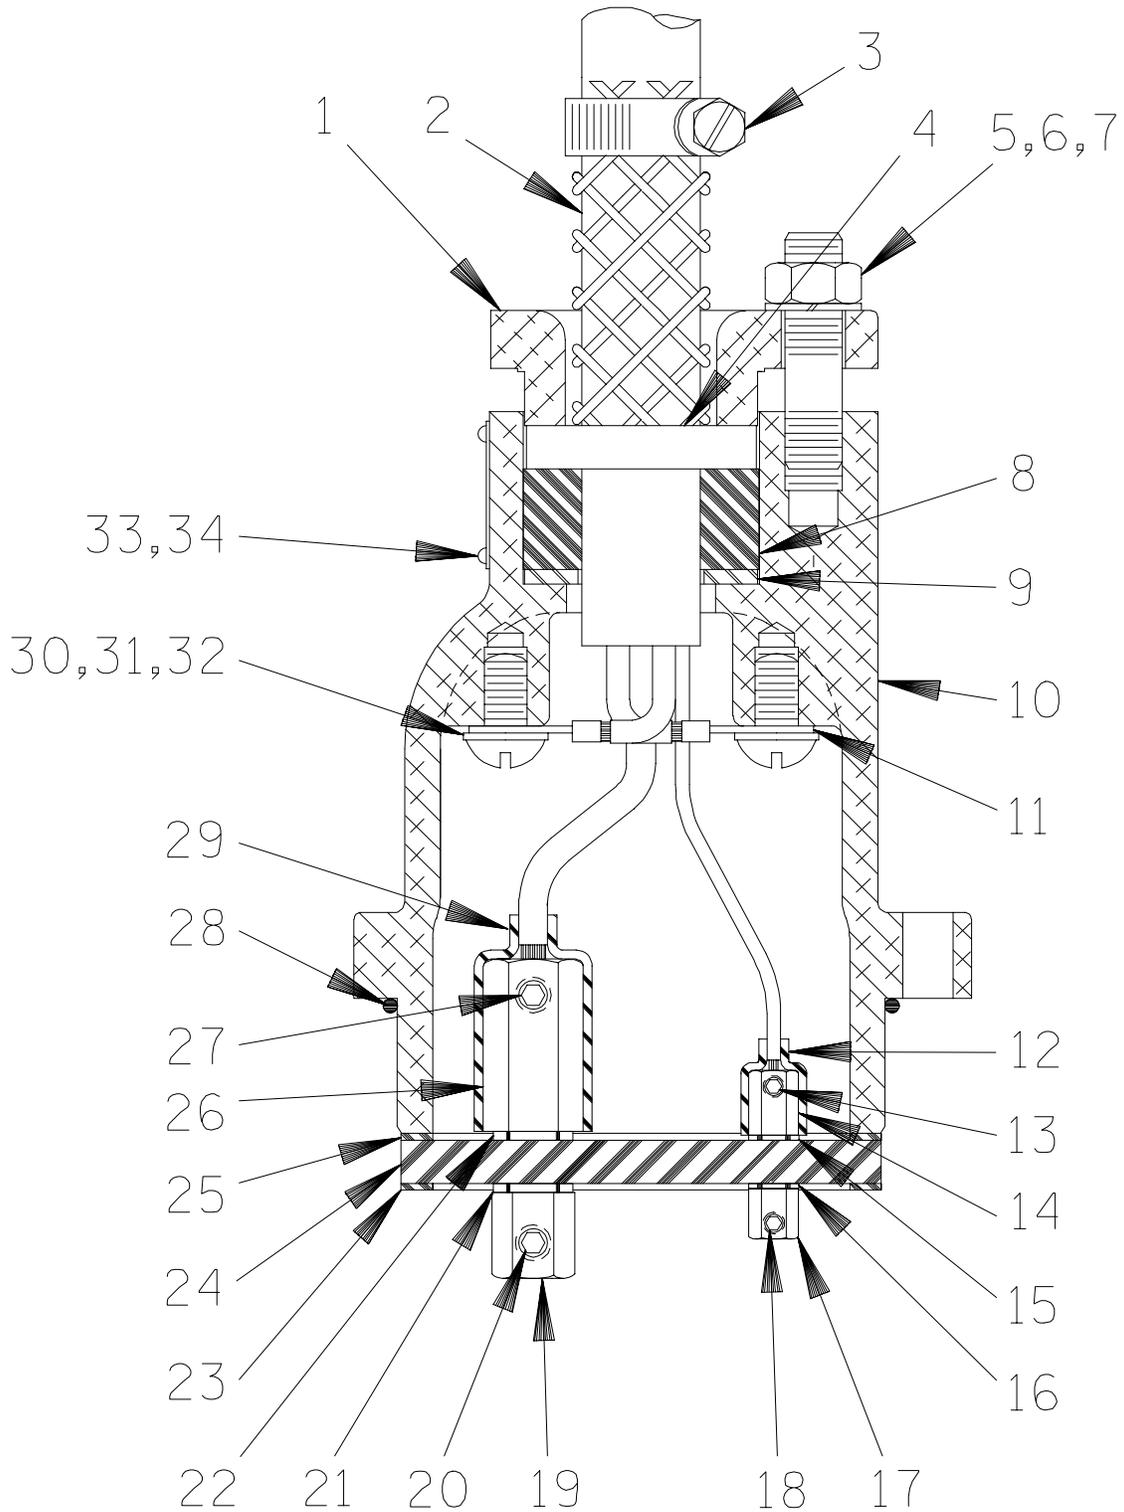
SM4G's And SM4J's Terminal Housing & Cable Assembly
